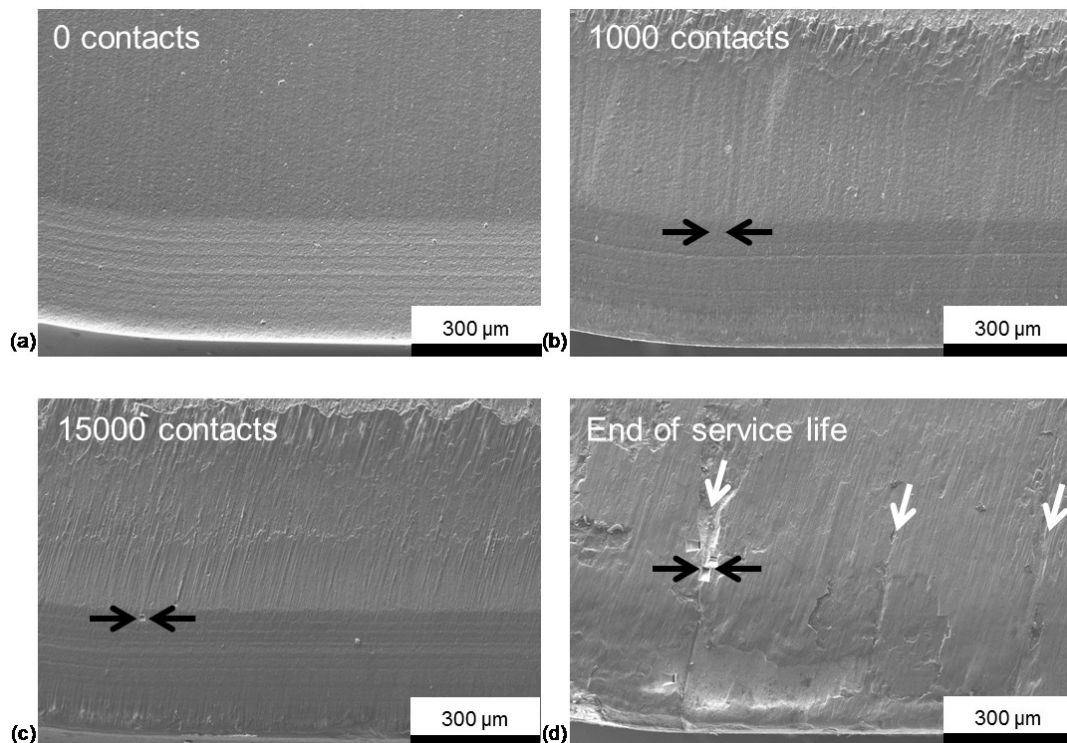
SEM micrographs showing surface topography of the rake faces of milling inserts at (a) zero, (b) 1000, (c) 15000 tool-workpiece contacts and (d) end of service life (about 40000 tool-workpiece contacts). Black arrows in (b), (c) and (d) indicate areas of detailed SEM / FIB investigations shown in Fig. 6. White arrows in (d) indicate positions of combcracks at end of service life.
